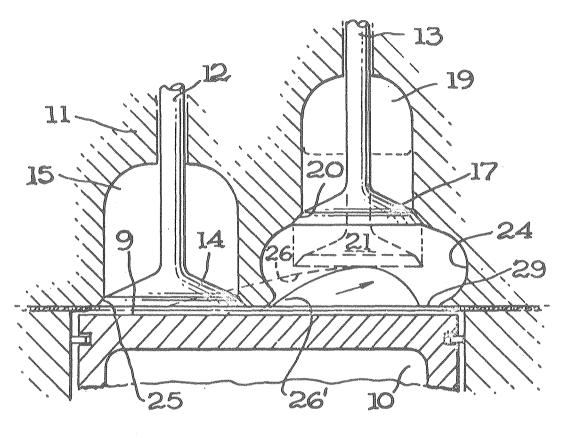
Combustion chamber of May engine (Ref. 44); 9 - flat piston head, 10 - piston, 11 - cylinder head, 12 - intake valve, 13 - exhaust valve, 14 - valve disc, 15 - intake port, 17 - valve disc, 19 - exhaust port, 20 - outlet aperture, 21 - swirl chamber, 24 - circumferential wall, 25 - inlet aperture, 26 - cavity, 26' - guide channel, 29 - swirl chamber opening.
